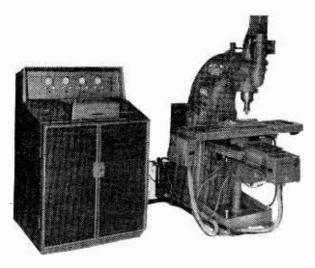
Ferranti equipment for controlling a Kearney and Trecker milling machine. The magnetic tape is "played back" in a compartment on the top of the control console.
